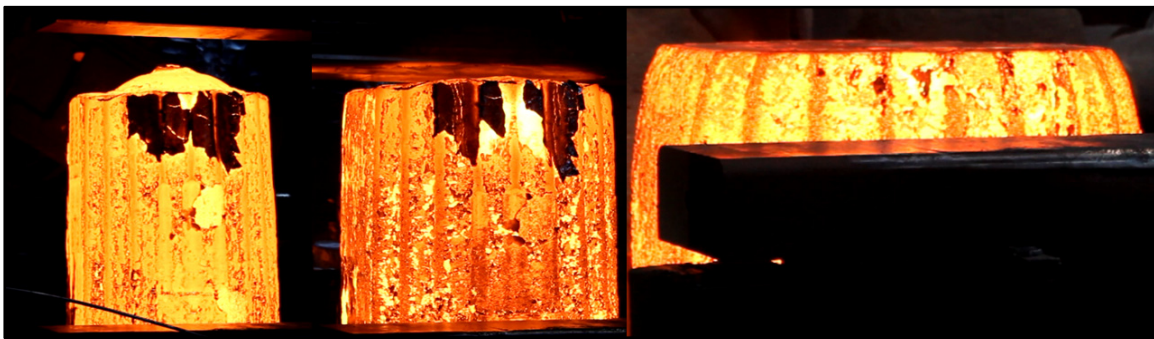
Upsetting a) Left: Ingot with dish stool, b) Middle: Dish stool removal
